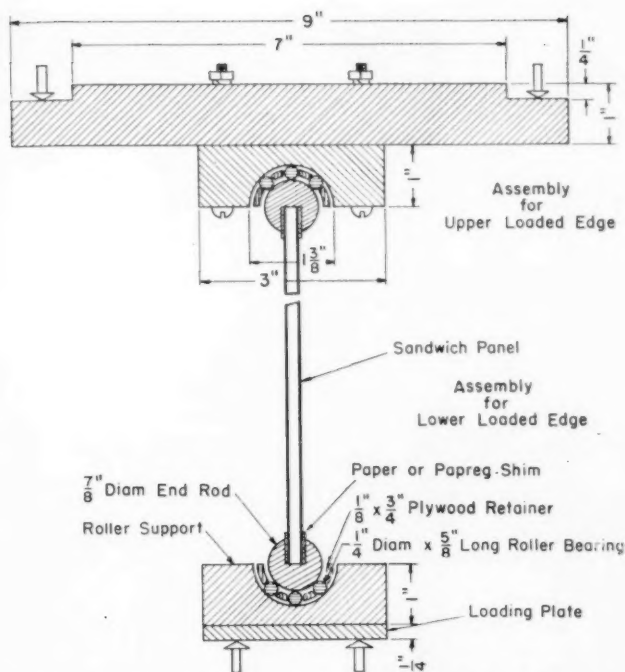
Sketch Showing the Details of the Fixtures by Which Simple Support of the Loaded Edges of Sandwich Panels Was Attained.
